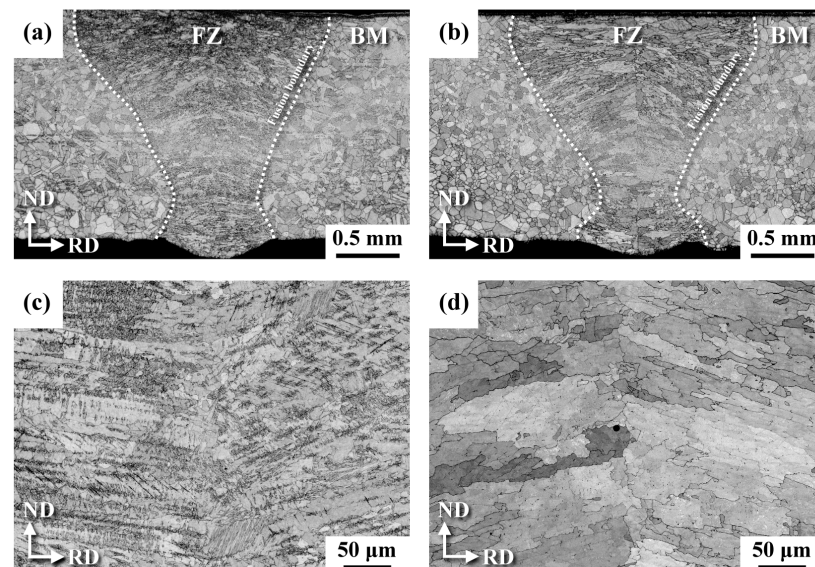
Macro-views of the (a) 304 and (b) 316 laser welds; FZ microstructures of the (c) 304 and (d) 316 welds in a cross-sectional view.
